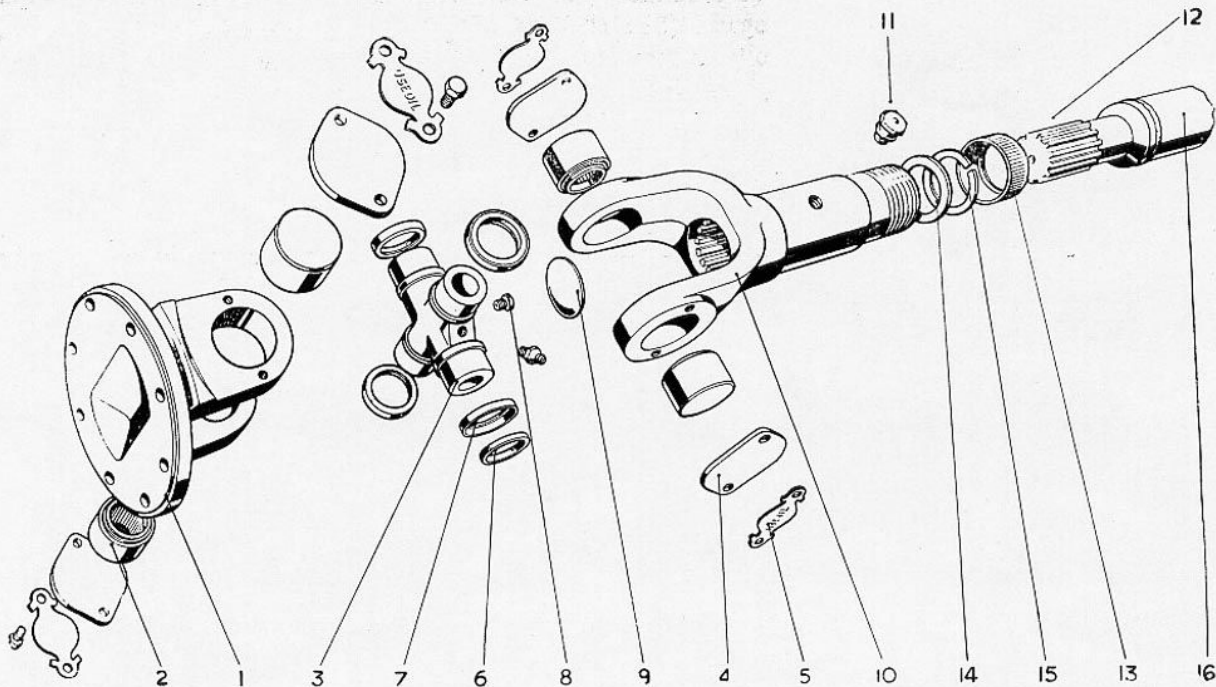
EXPLODED VIEW OF UNIVERSAL JOINT (See Fig. 2 for Key to numbers)
